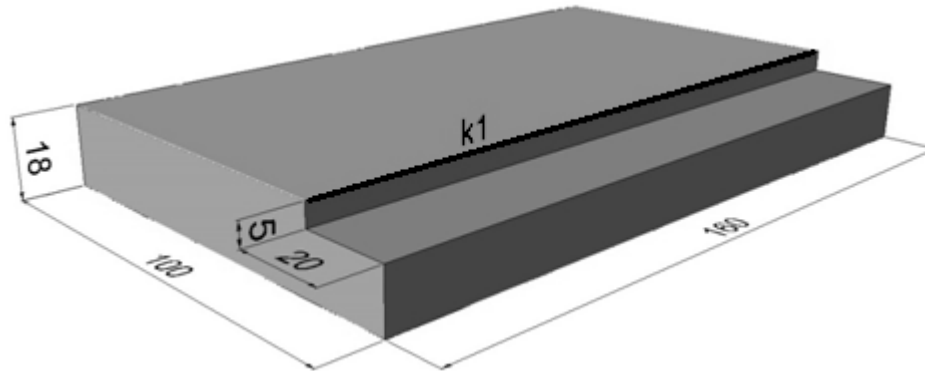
Dimensions and shape of samples (in mm) with a marked edge k1.
